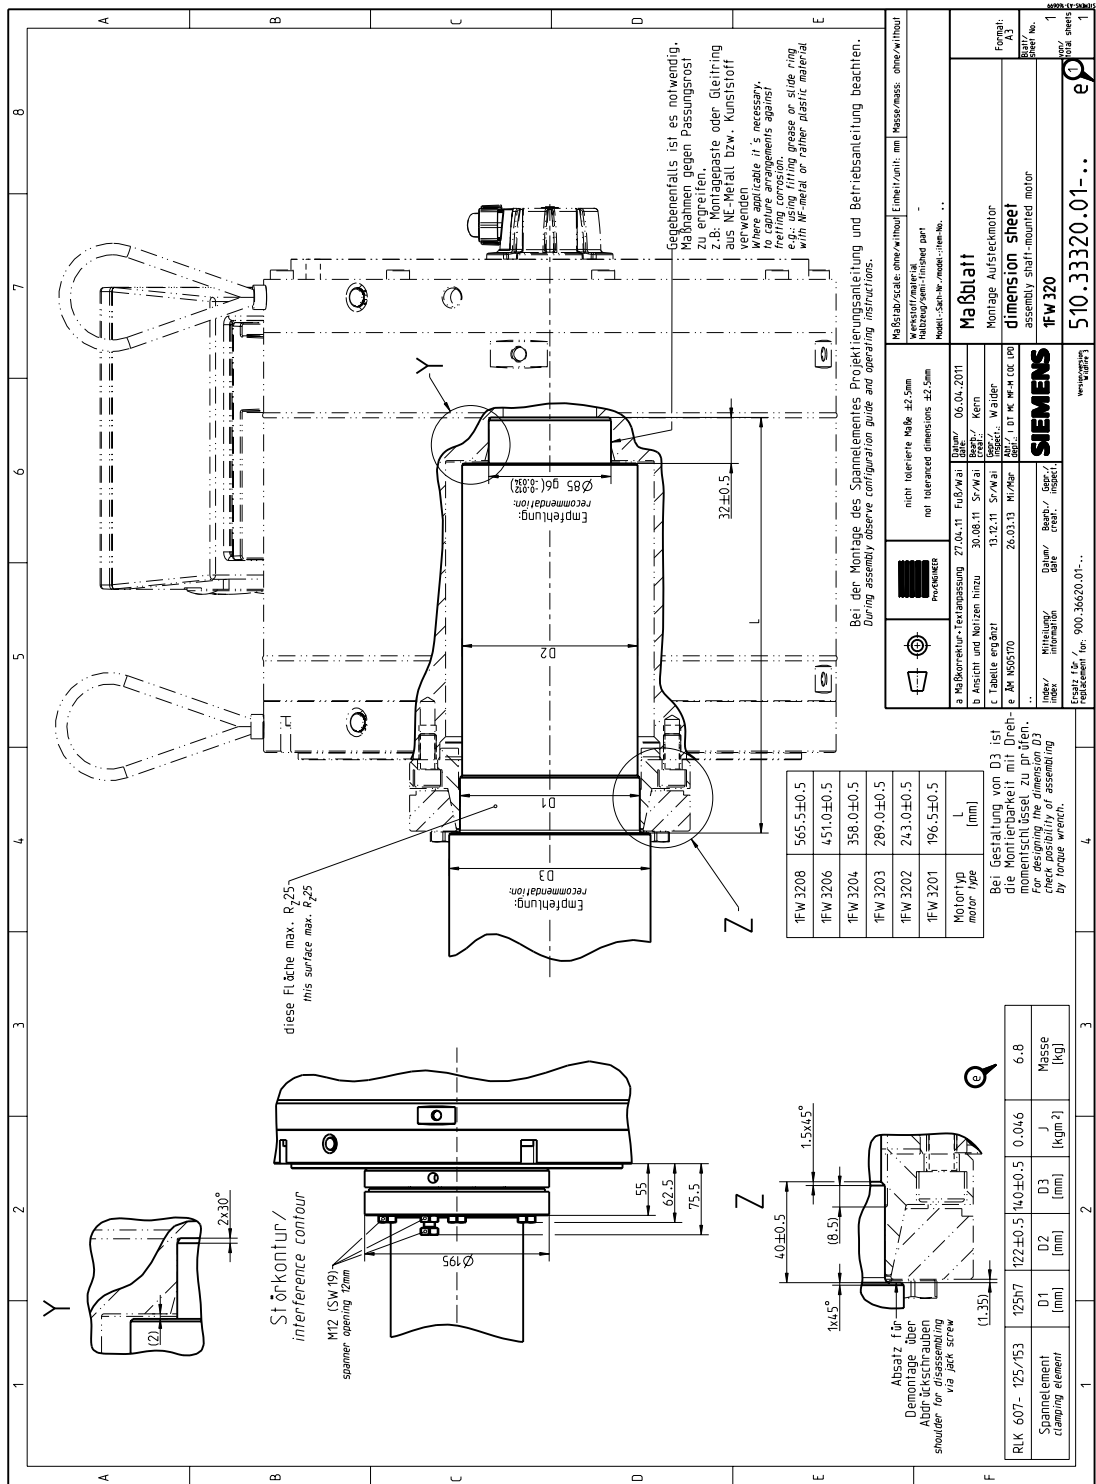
Dimension drawing, mounting plug-on motor 1FW320
